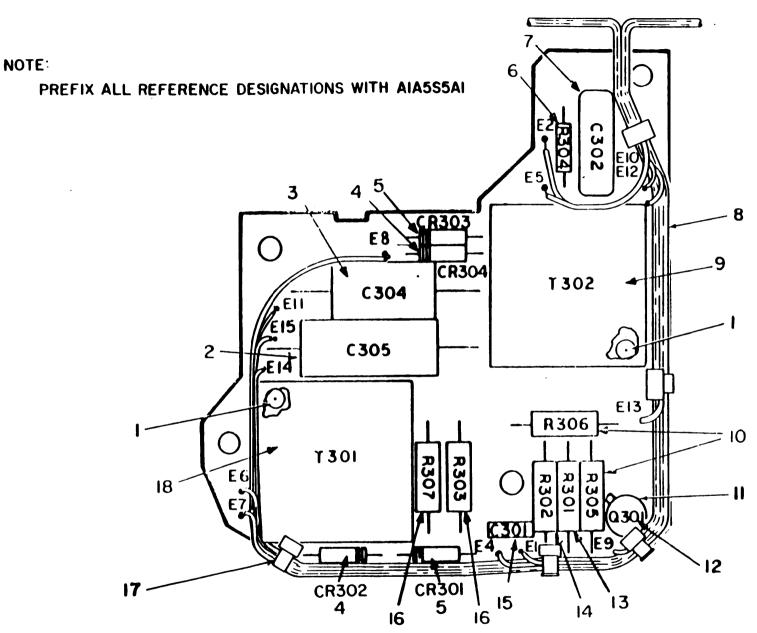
Oscillator Assembly, Circuit Cards Assembly.
